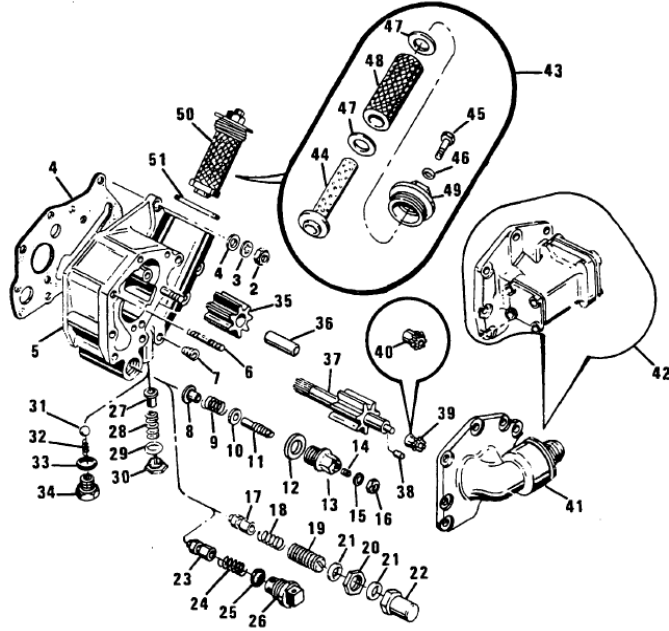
OIL PUMP ASSEMBLY
